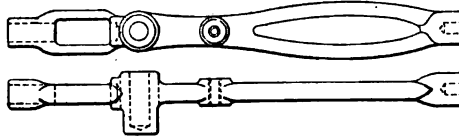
Work to be Drilled in Jig, Fig. 57.
